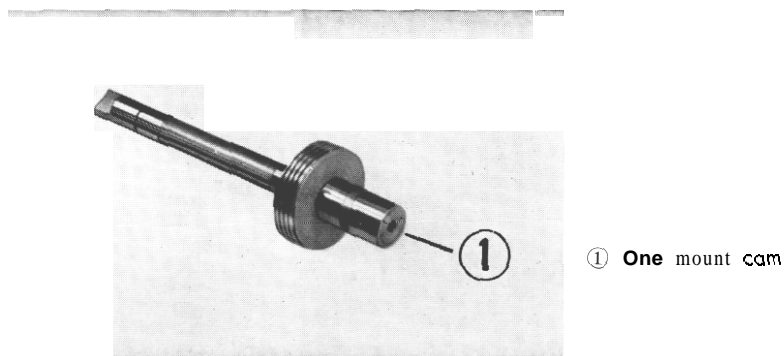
Point shaft cam profile (Model CB72, 77-1 type)
